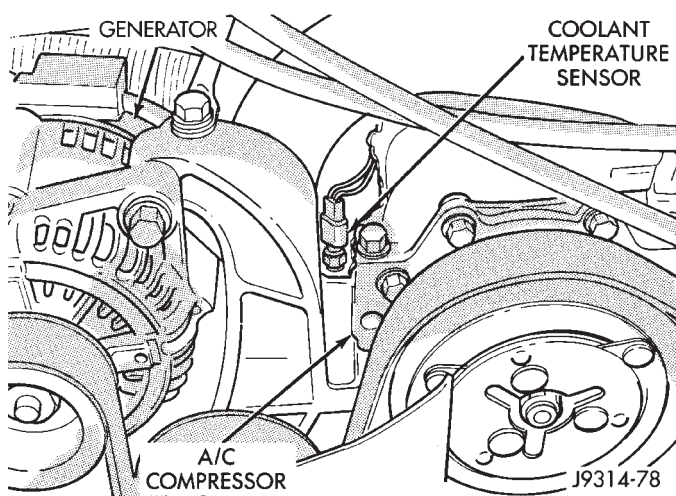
Engine Coolant Temperature Sensor—5.2L Engine
